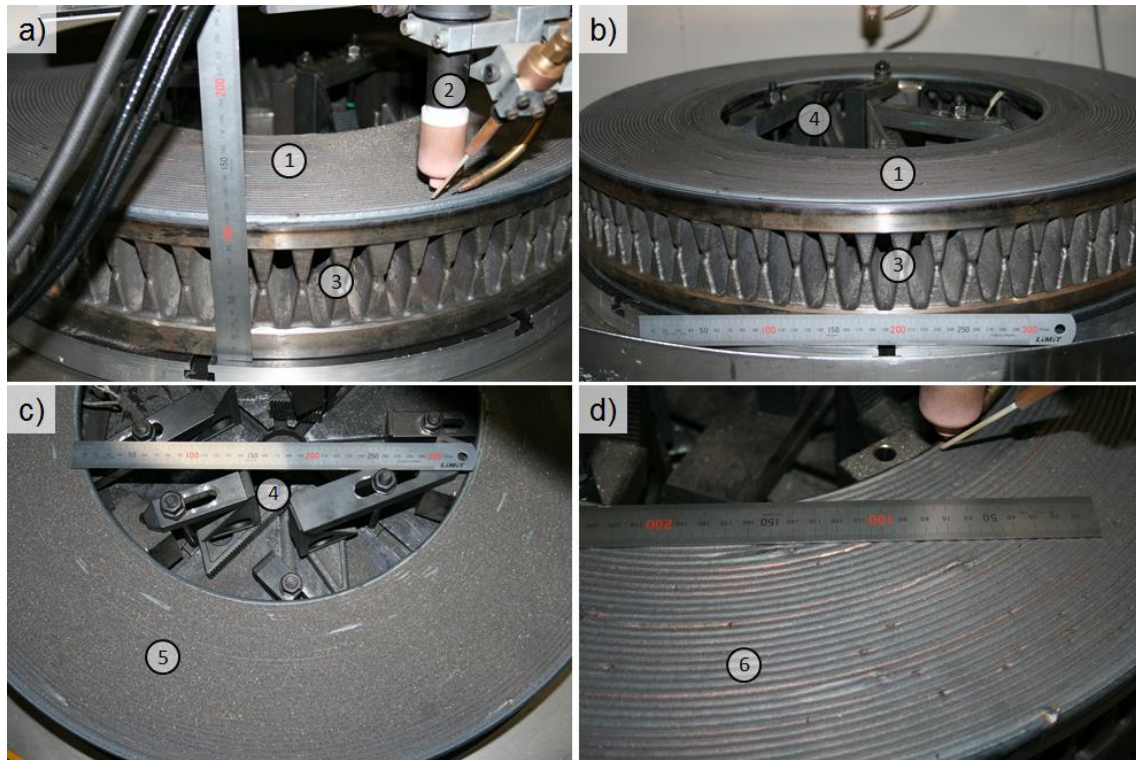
640 mm railway brake disc; a) GTA clad disc with TIG torch still in position; b) overview disc after second cladding; c) top view after cladding (WC powder left on the disc; d) cleaned disc section; 1: wear surface; 2: TIG torch; 3: cooling vanes; 4: clamping system; 5: GTA clad surface; 6: brush cleaned welding trials
